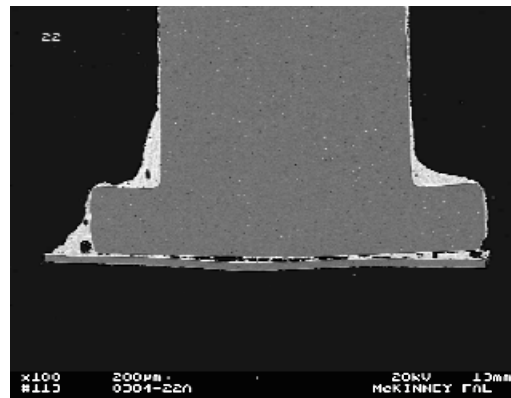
Cross-Sectional Image of Pin Solder Joint (100X).
